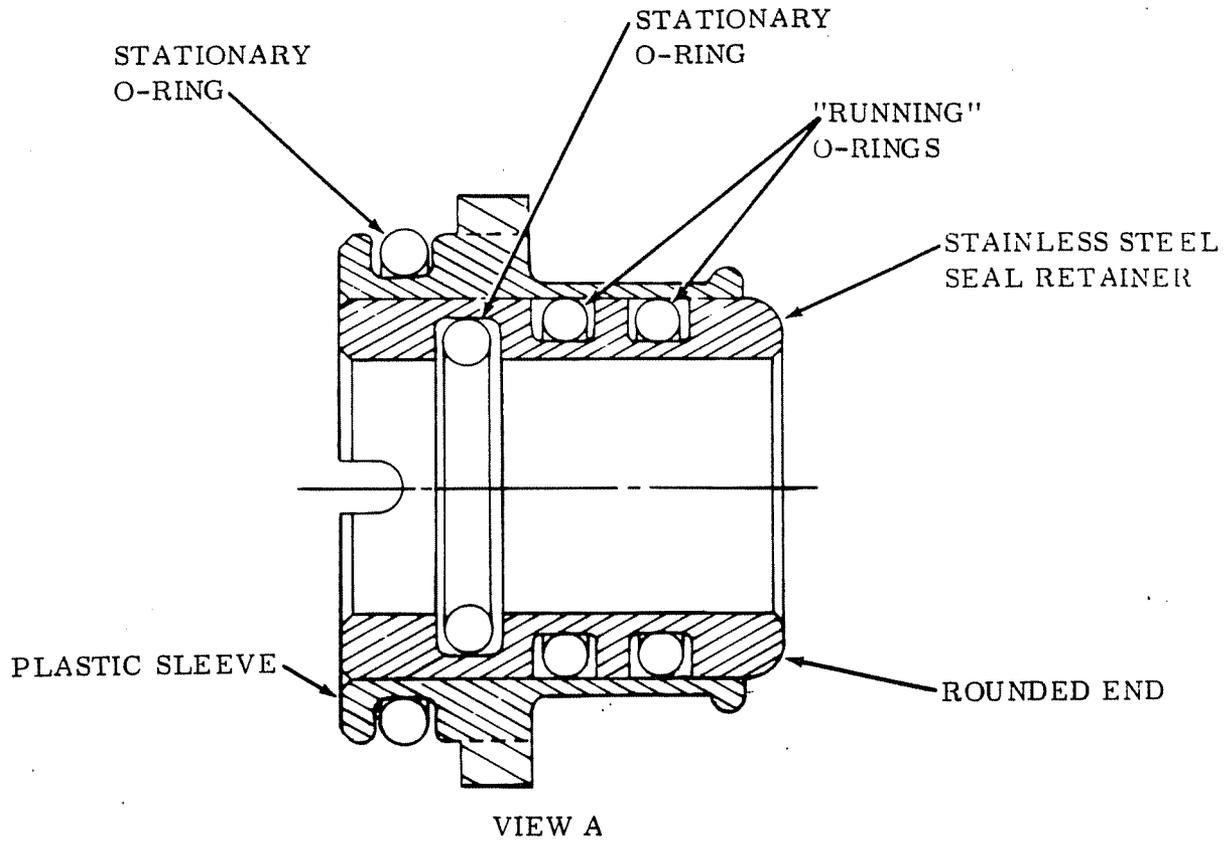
Installing Shaft Seal Assembly in Freeze Cylinder
